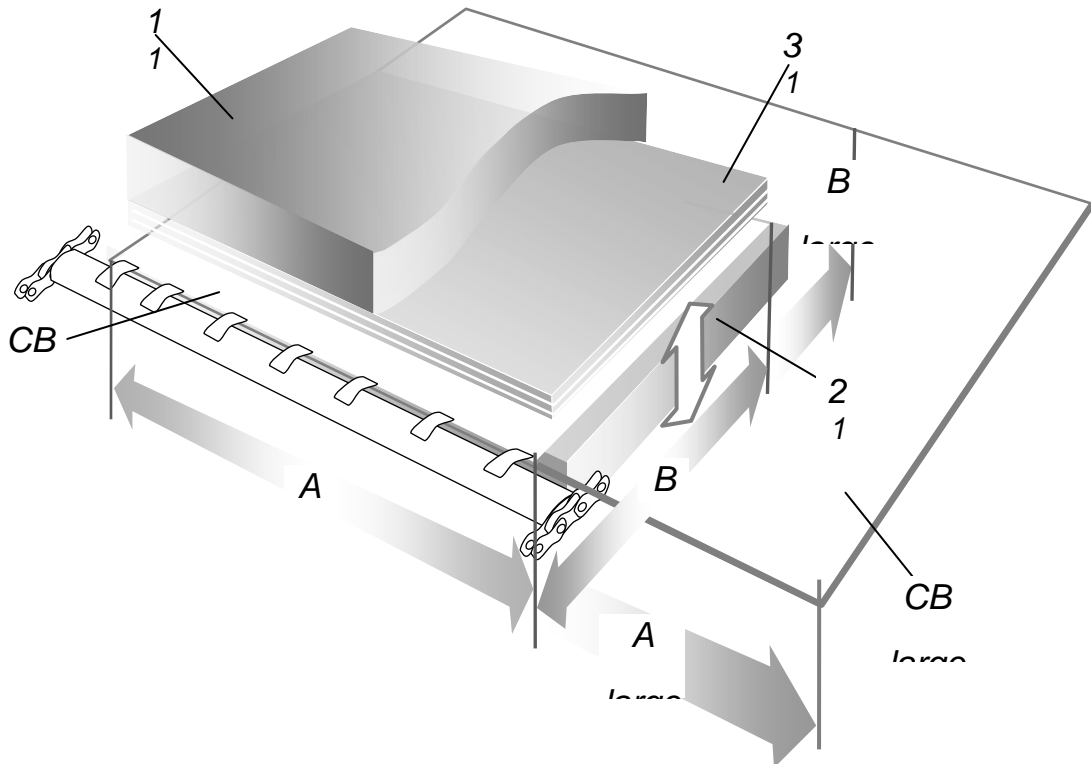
Comparison of geometric dimensions of die-cutting press and large-sized corrugated fibreboard blanks
